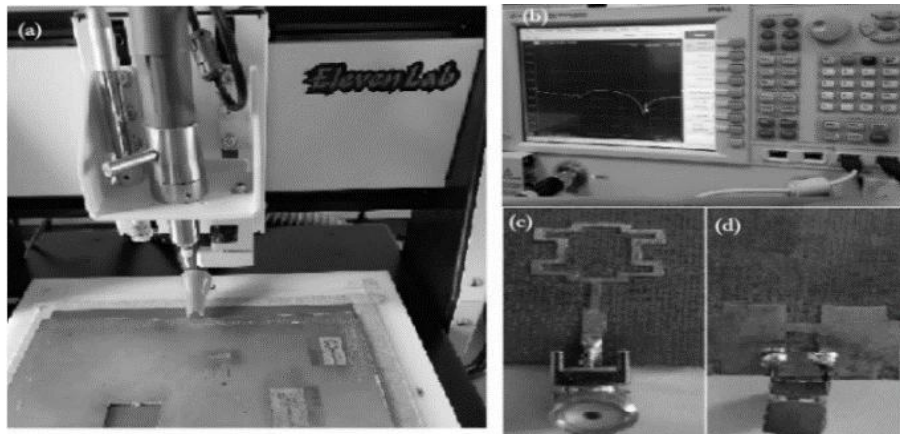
Fabrication and return loss measurement setup:(a) Antenna milling Machine
